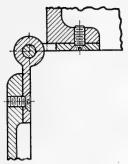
Common steel hinge applied to a machine-tool cover.
